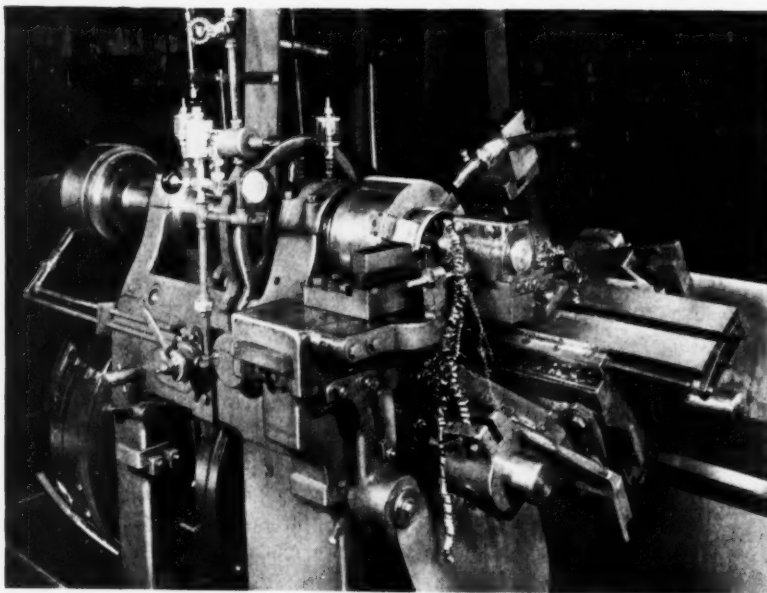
Machine Shown in Fig. 1 as Re-equipped with Air-operated Chuck and Taper Attachment
